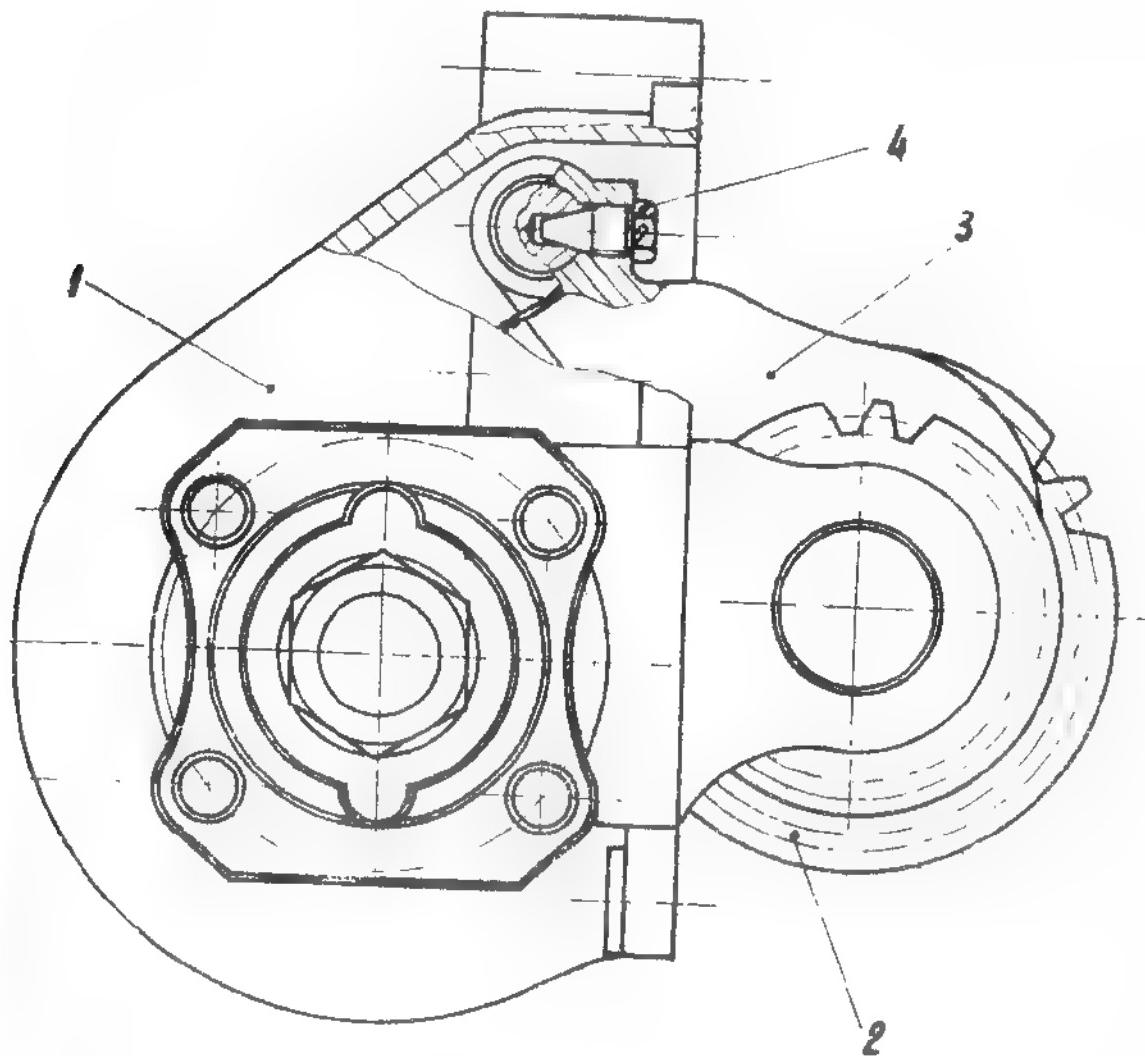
GEARBOX POWER TAKE-OFF (see also Fig. 4.97)
